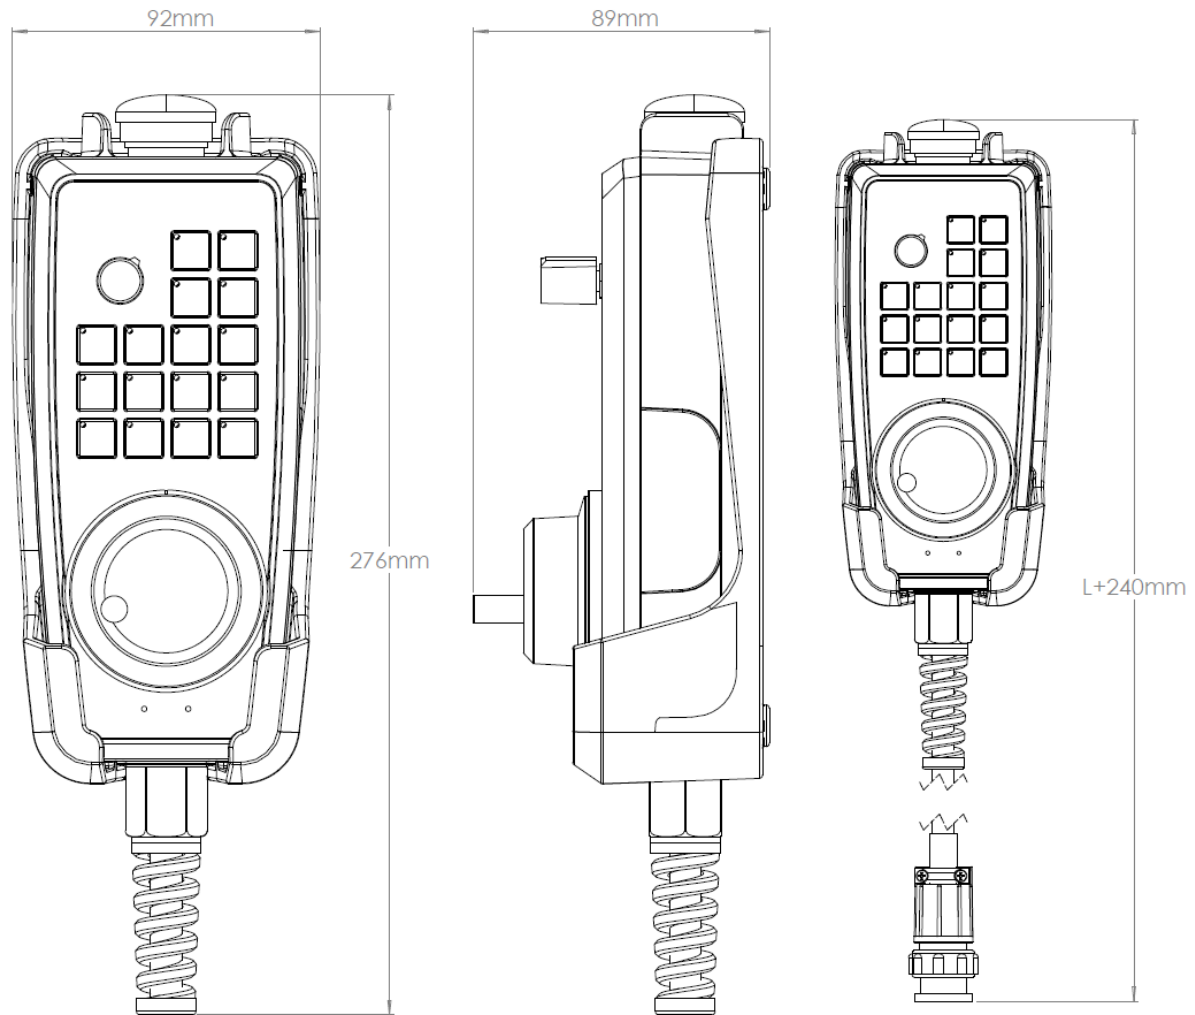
Remote Pendant Lite with Cradle Dimensions (mm)
